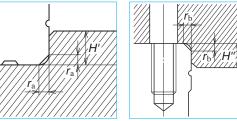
Shoulder for the Fig. 10 Shoulder for the ball rail datum surface
